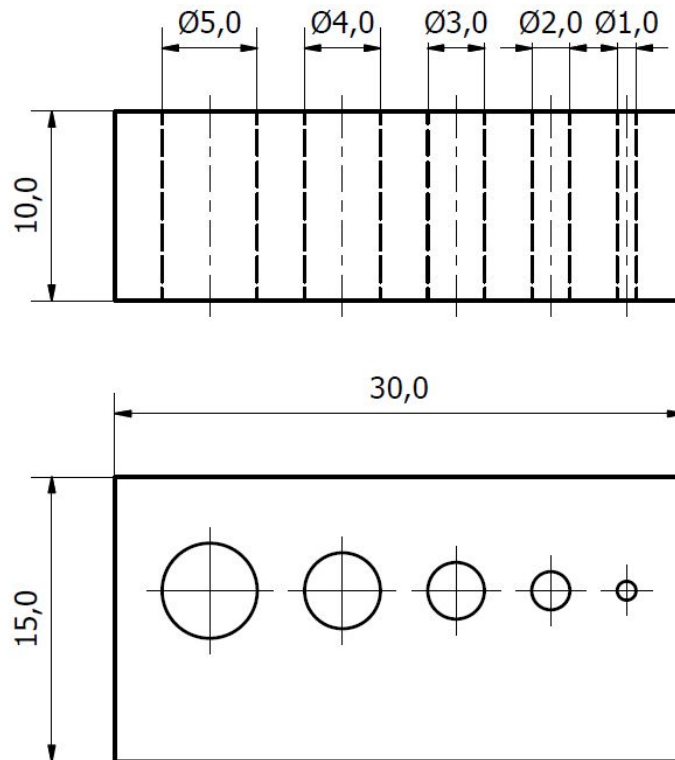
Drawing of a test sample with holes of diameters ranging from 1 mm to 5 mm
